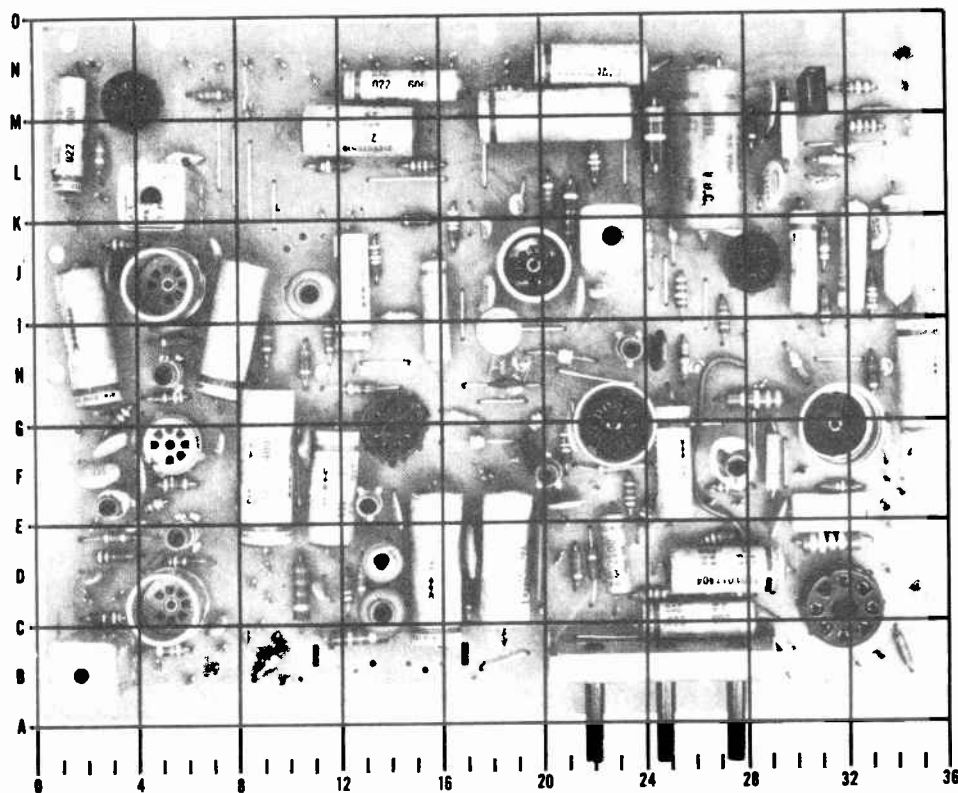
Top view of printed circuit board. Guide to location of resistors, capacitors, coils, and transformers when used with the chart below.
